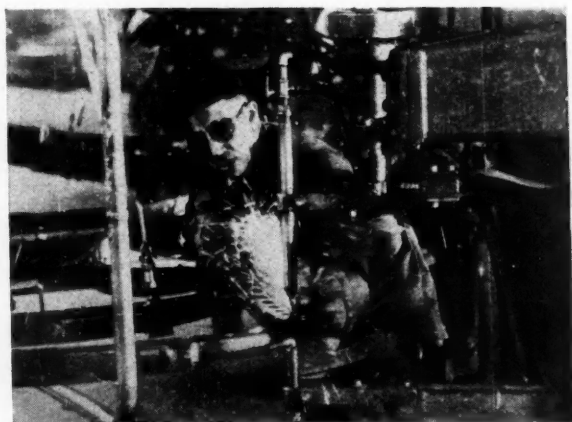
Final welding in the assembly of side panels and frame is accomplished with a battery of spot welders + +
